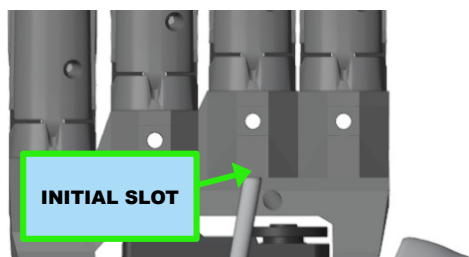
Inserting the tube into the initial slot (rear view)
